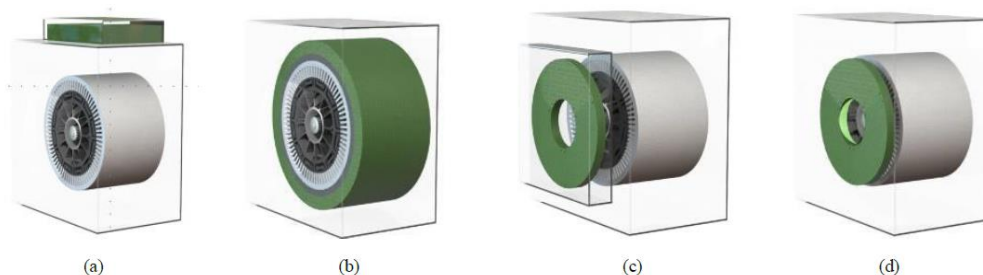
Motor and inverter integration options [26] (a) radial housing mount; (b) radial stator mount; (c) axial endplate mount; (d) axial stator mount.
